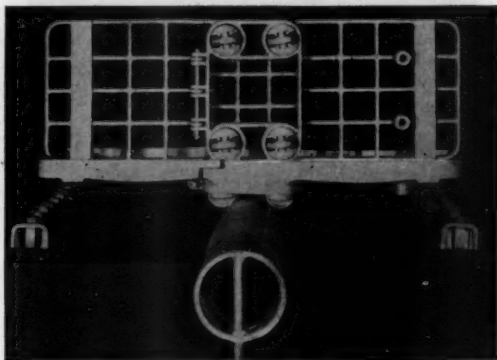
SMOOTH SCREW FURNACE CONVEYOR—THE ROTATION OF TUBE MOVES TRAYS AT ANY DESIRED SPEED, WITH HINGED TRAYS HAVING REPLACEABLE ROLLERS AND BEARINGS. FURNACE IS SELF-EMPTYING AND CAN BE OPERATED CONTINUOUSLY OR INTERMITTENTLY. ONE TRAY SHOWN TIPPED EDGE-WISE ON TOP OF A TRAY IN CORRECT POSITION.
